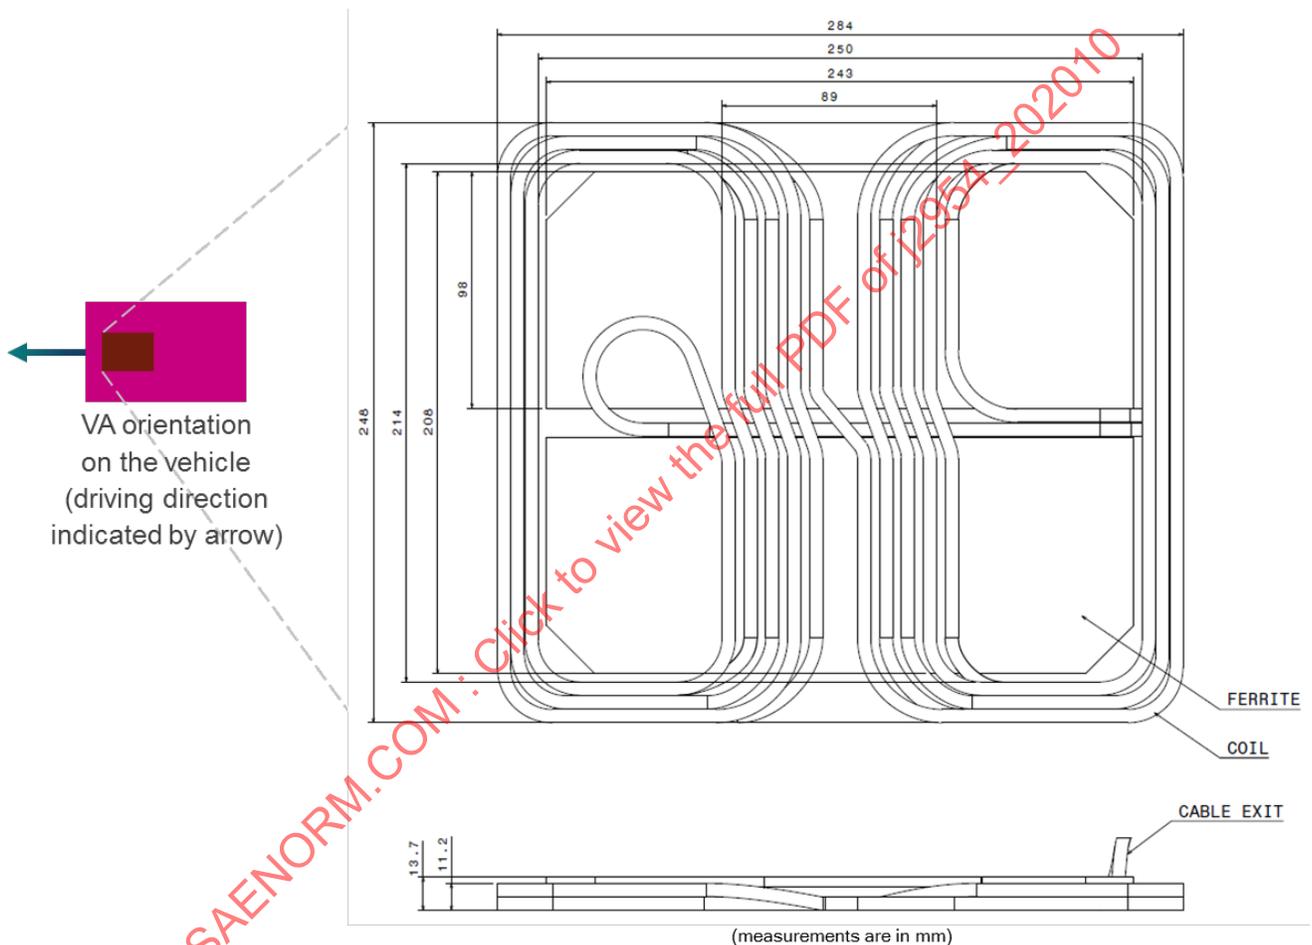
Mechanical dimensions of the Product VA WPT3/Z1
